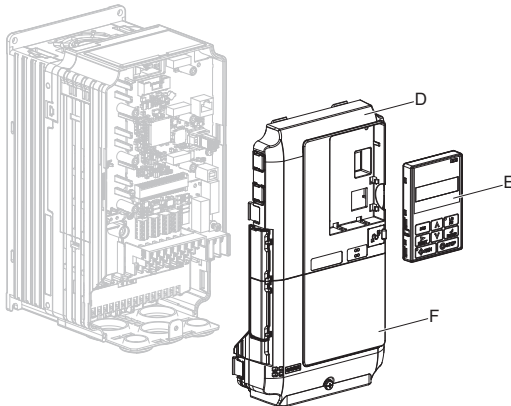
Remove the Front Cover, Terminal Cover, and Keypad
